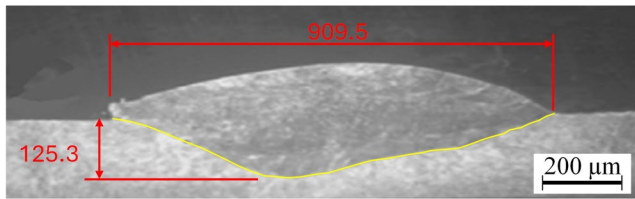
Cross-section and surface view of bead geometry (No. 20). Powder: Inconel 718; Base metal: STS 316 L. Parameters: Laser power: 300 W; Nozzle speed: 500 mm/min; Powder feed rate: 8 g/min. Fixed Parameters: Coaxial gas: 6 L/min; Feeding gas: 3.5 L/min. OM image captured using Axiolab 5 (Zeiss, Germany). The scale bar is shown in the image
